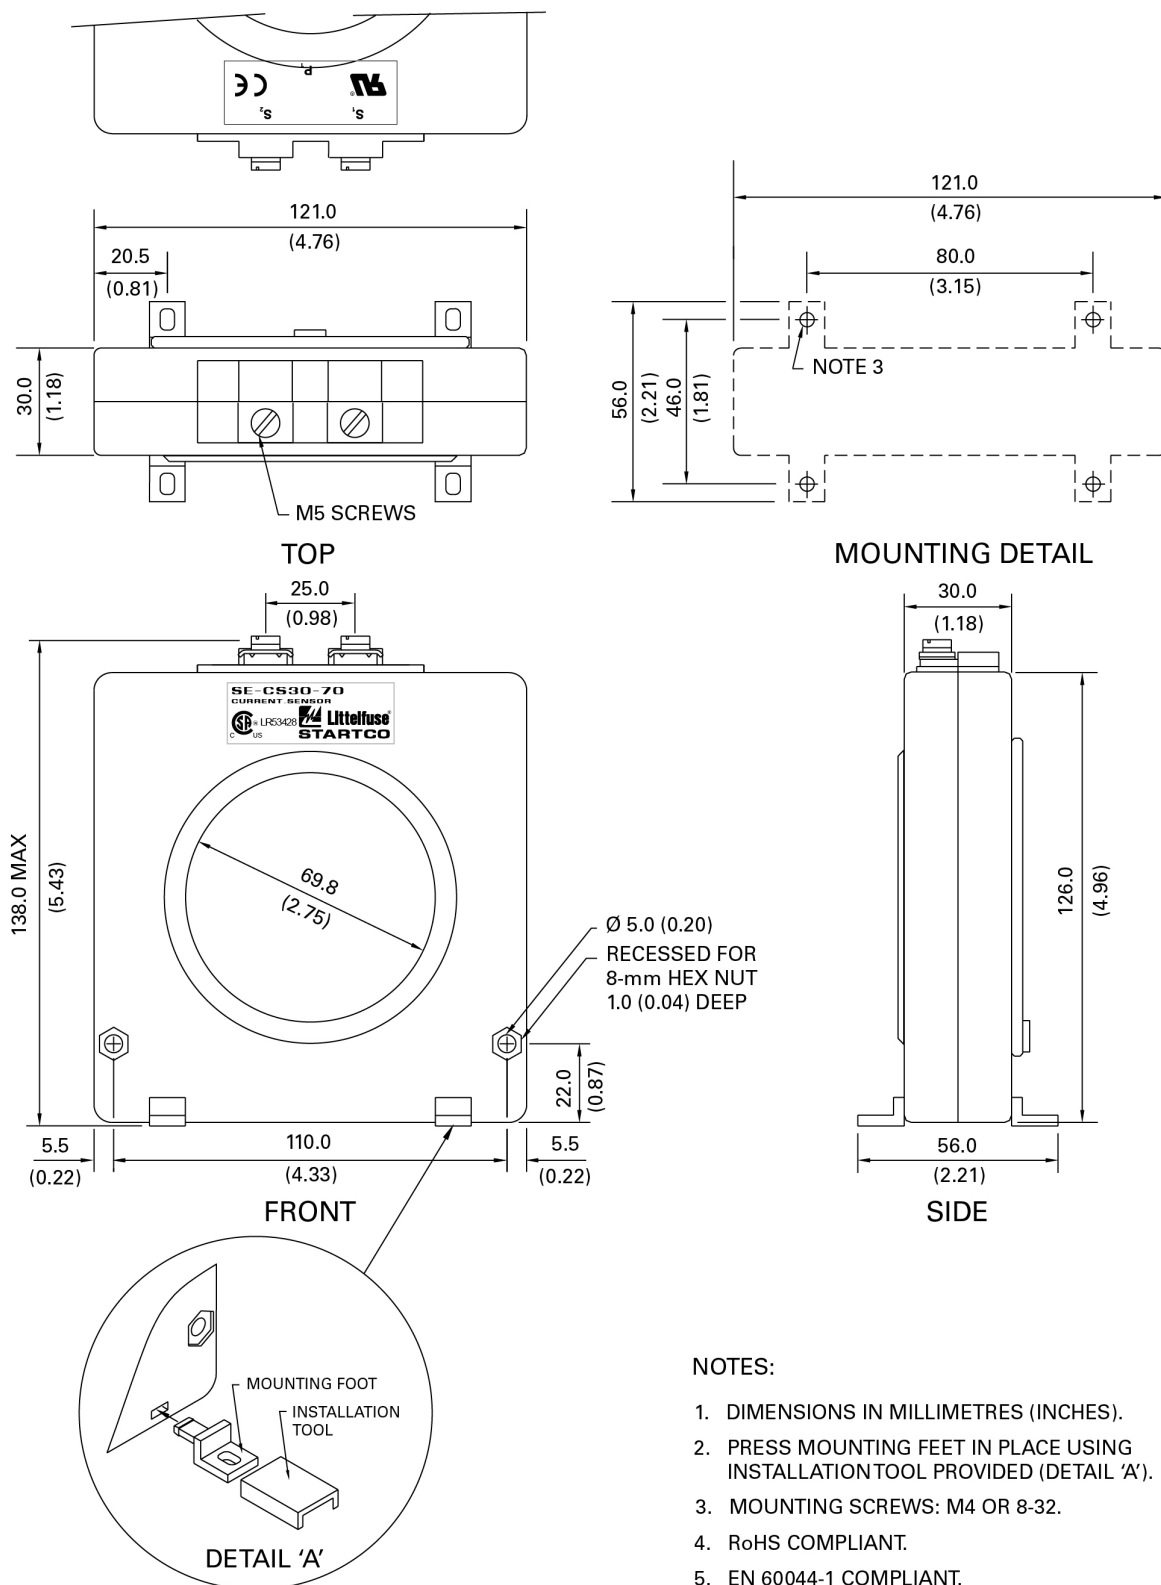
SE-CS30-70 Outline and Mounting Details.
